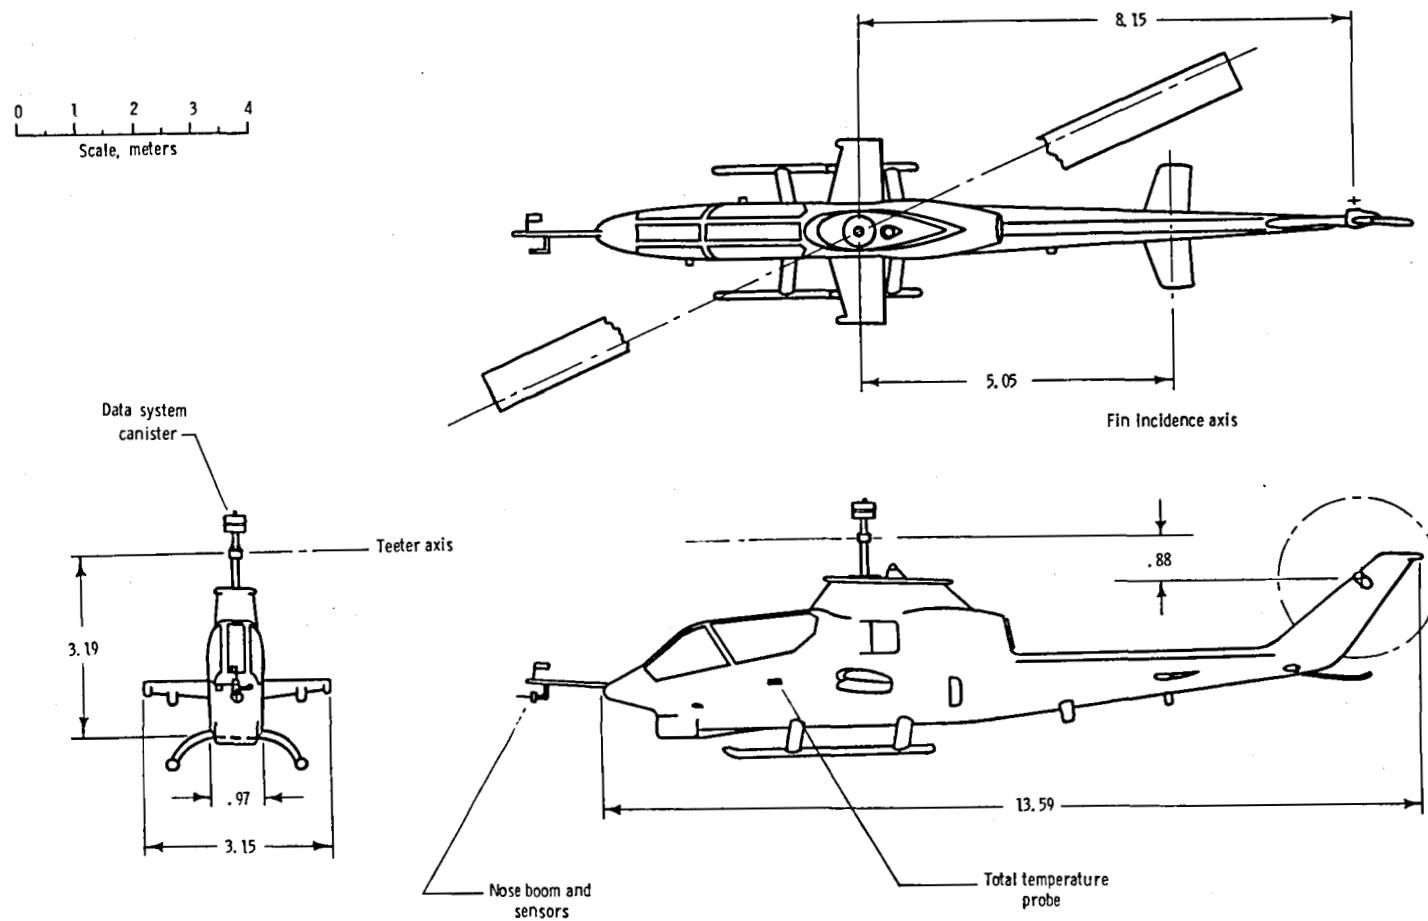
Three-view scale drawing of aircraft. All dimensions are given in meters.
